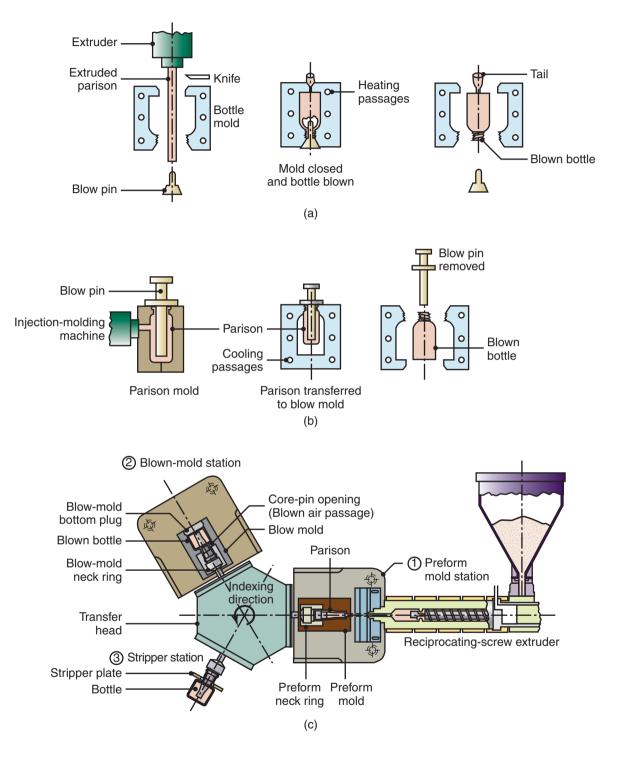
Schematic illustrations of (a) the extrusion blow-molding process for making plastic beverage bottles; (b) the injection blow-molding process; and (c) a three-station injection blow-molding machine for making plastic bottles.
